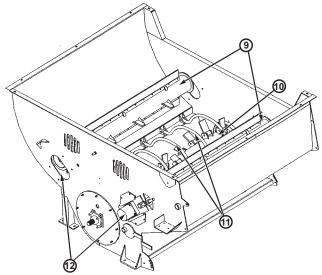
(1) Hydraulic bale forks, (2) Upper side deflector, (3) Auger system, (4) Distribution chamber, (5) Lower side deflector, (6) Processing rotor, (7) Side mount feed tank, (8) Tub/Chamber, (9) Bale feed rotors, (10) Flail knives, (11) Flail guard rods, (12) Feed rotor adjustment
